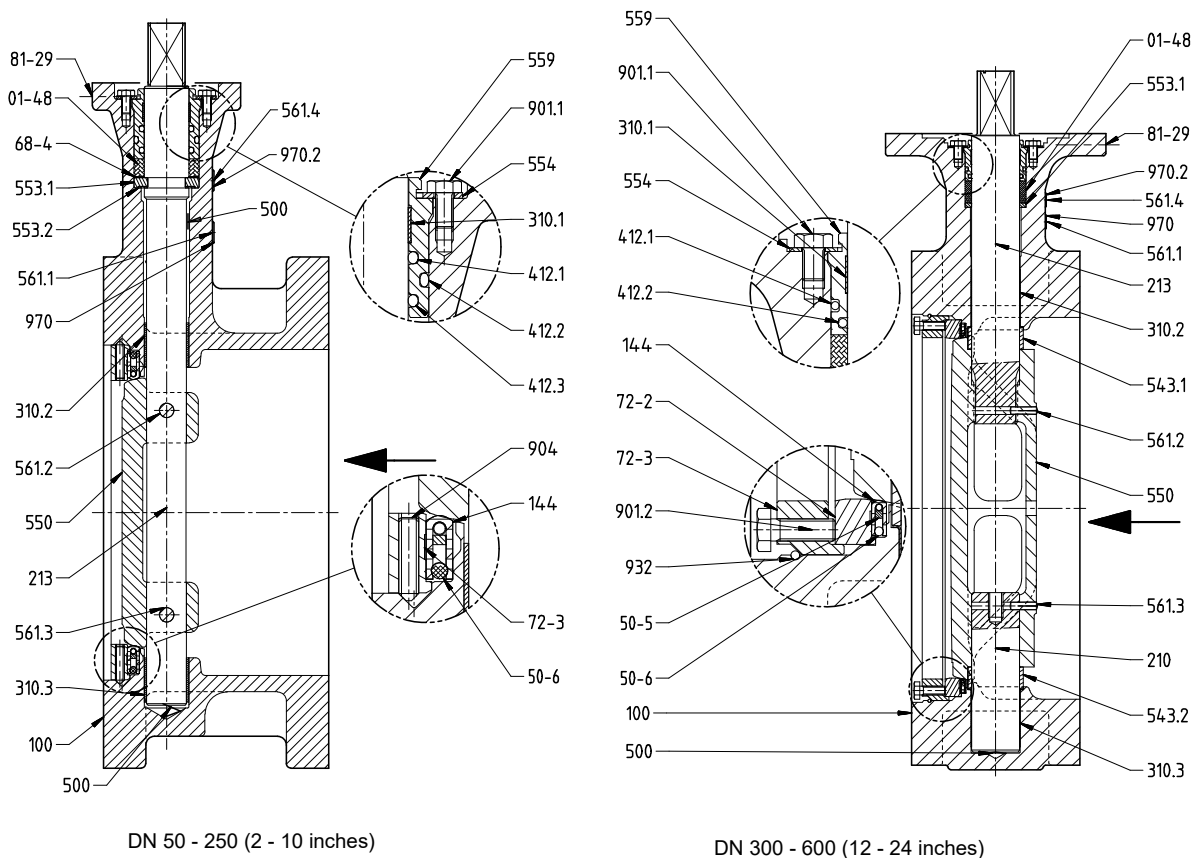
Sectional drawing of DANAIS MT II DN 300 - 600 (12 - 24 inches) / flanged body (T7) / plastomer design
